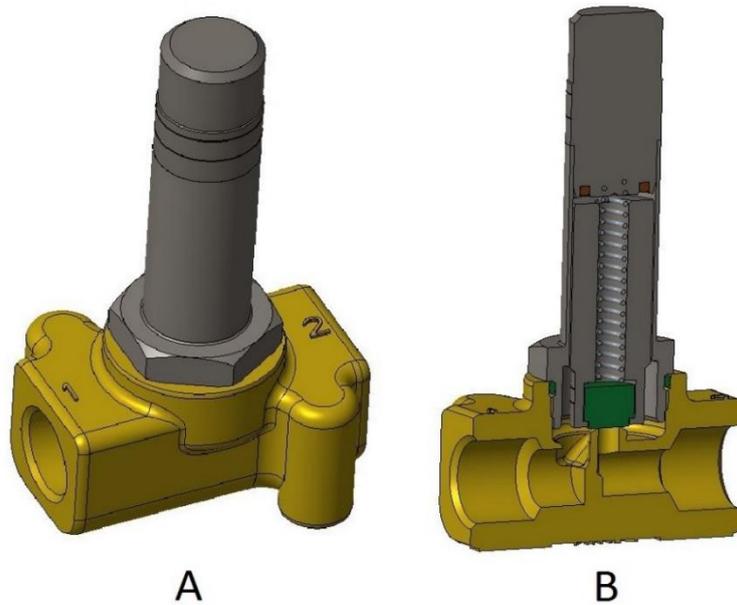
3D model of a valve in particular: external view (A) and sectional view (B) of a solenoid valve JN1
